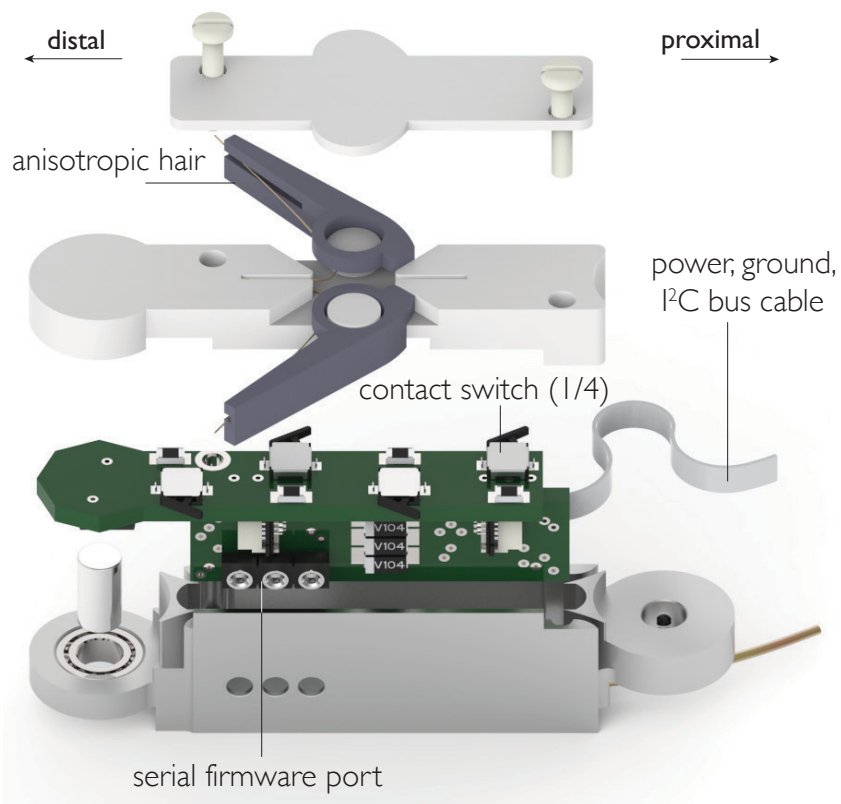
Exploded CAD rendering of a single segment (side view).
